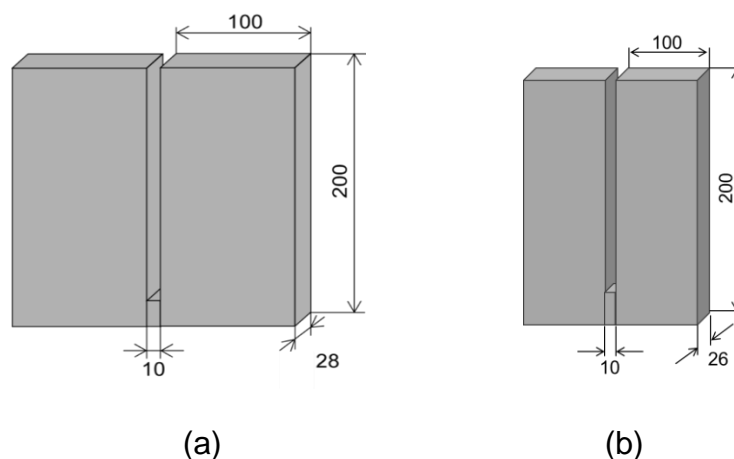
Specimen dimension for (a) Twin laser method and (b) Weaving laser method
